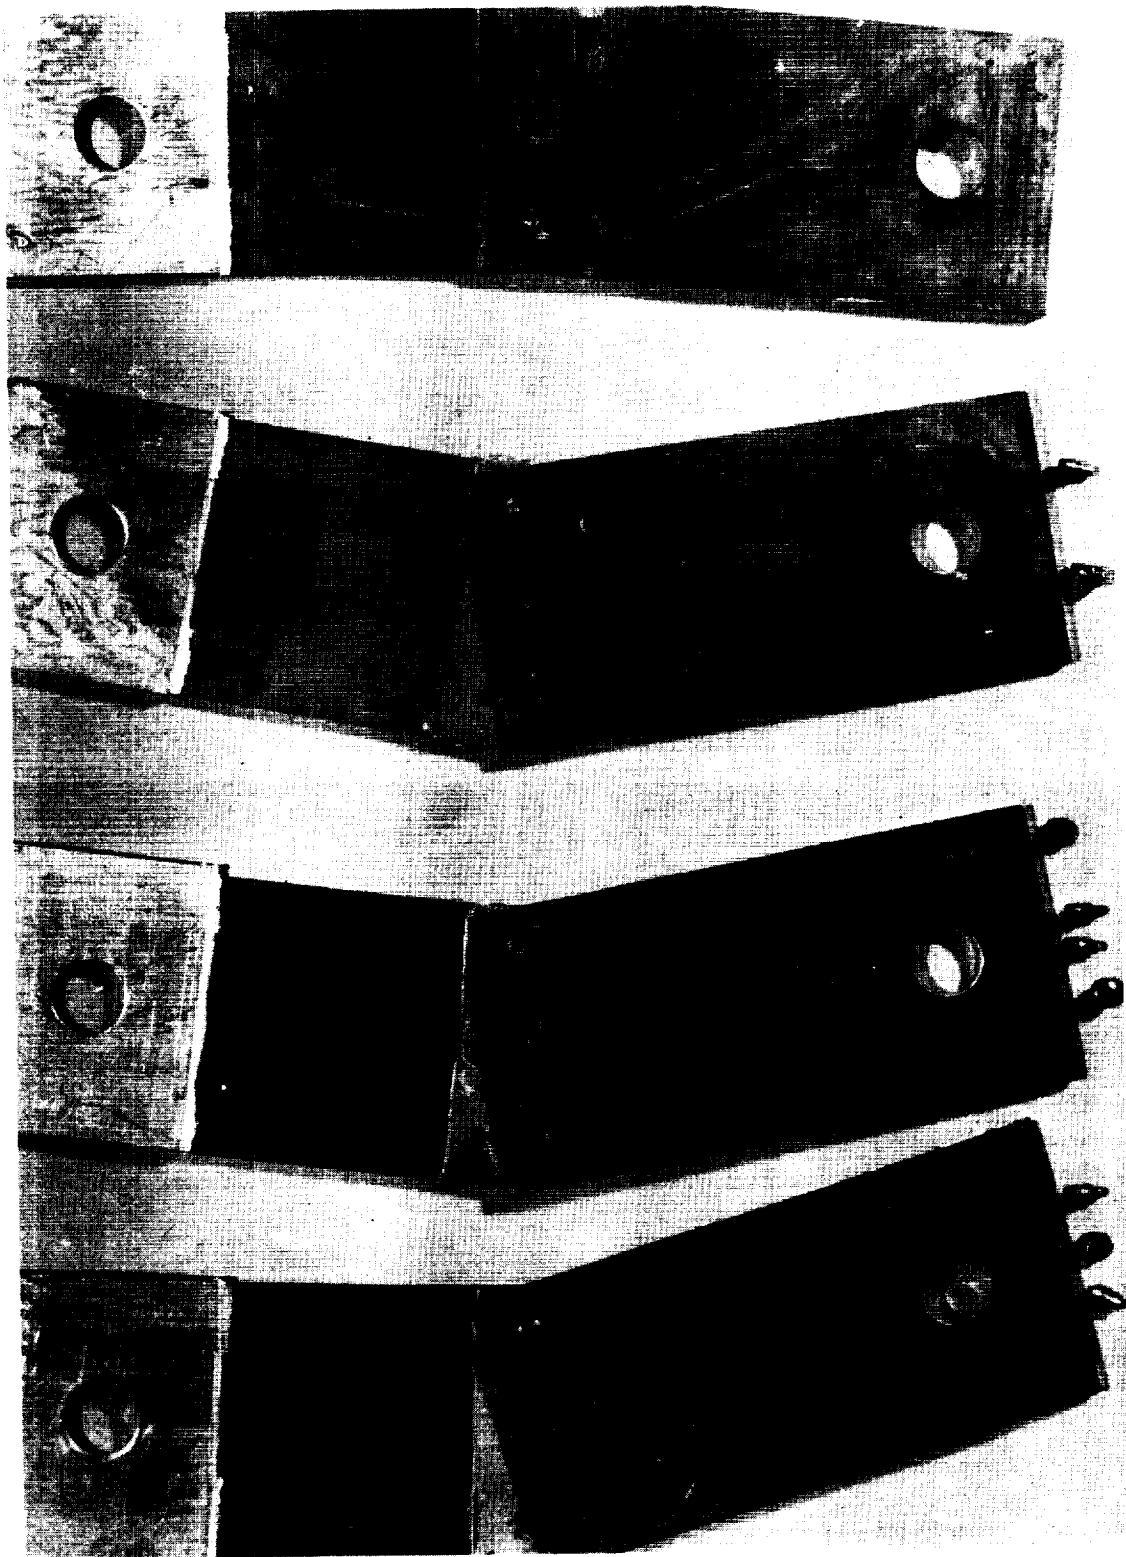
TYPE IF SPECIMENS - 0.060-INCH MATERIAL - TYPICAL FAILURE MODE
